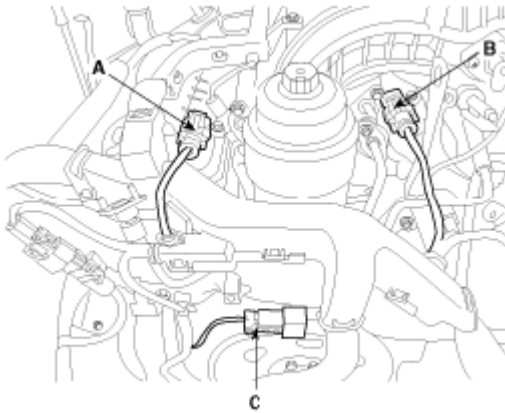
Identifying Connectors For LH Intake Camshaft CMP Sensor, RH Intake Camshaft CMP Sensor, & Condenser
